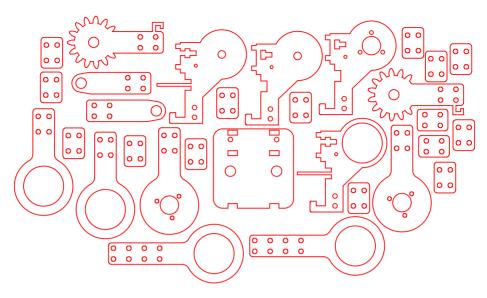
Drawing of the parts for the omniwheel prototype
